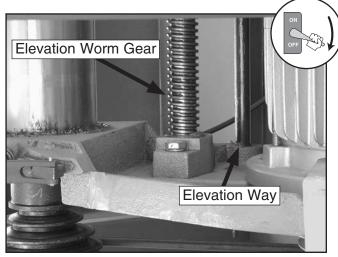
Spindle elevation worm gear and way (accessed through shaper front door).
